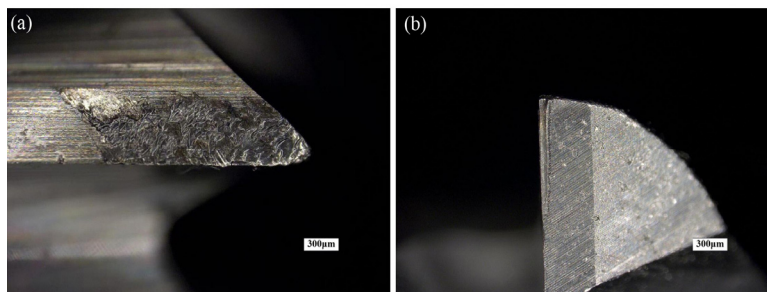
Wear of Uncoated Tools After 8 Minutes of Continuous Cutting: (a) Flank Face Wear Morphology; (b) Bottom Cutting Edge Wear Morphology
